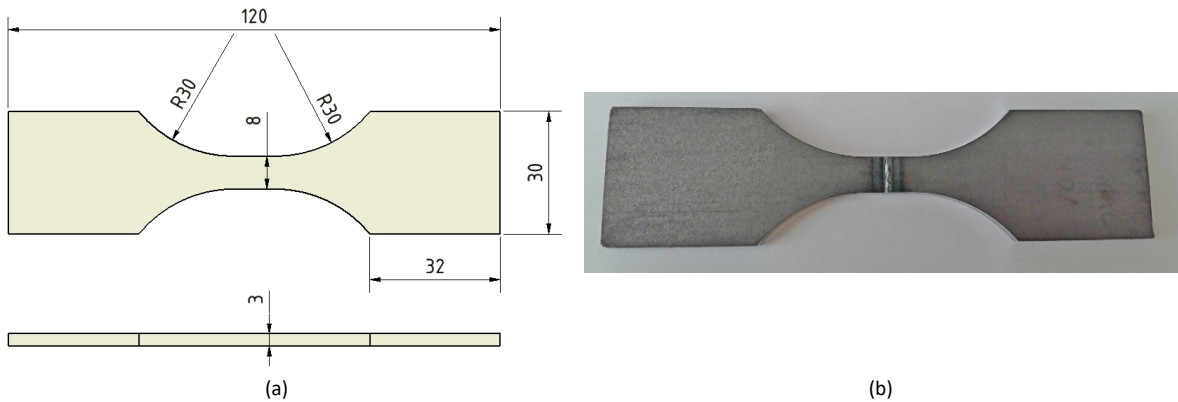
Fatigue tests samples dimensions (a) and a sample with the weld (b)
